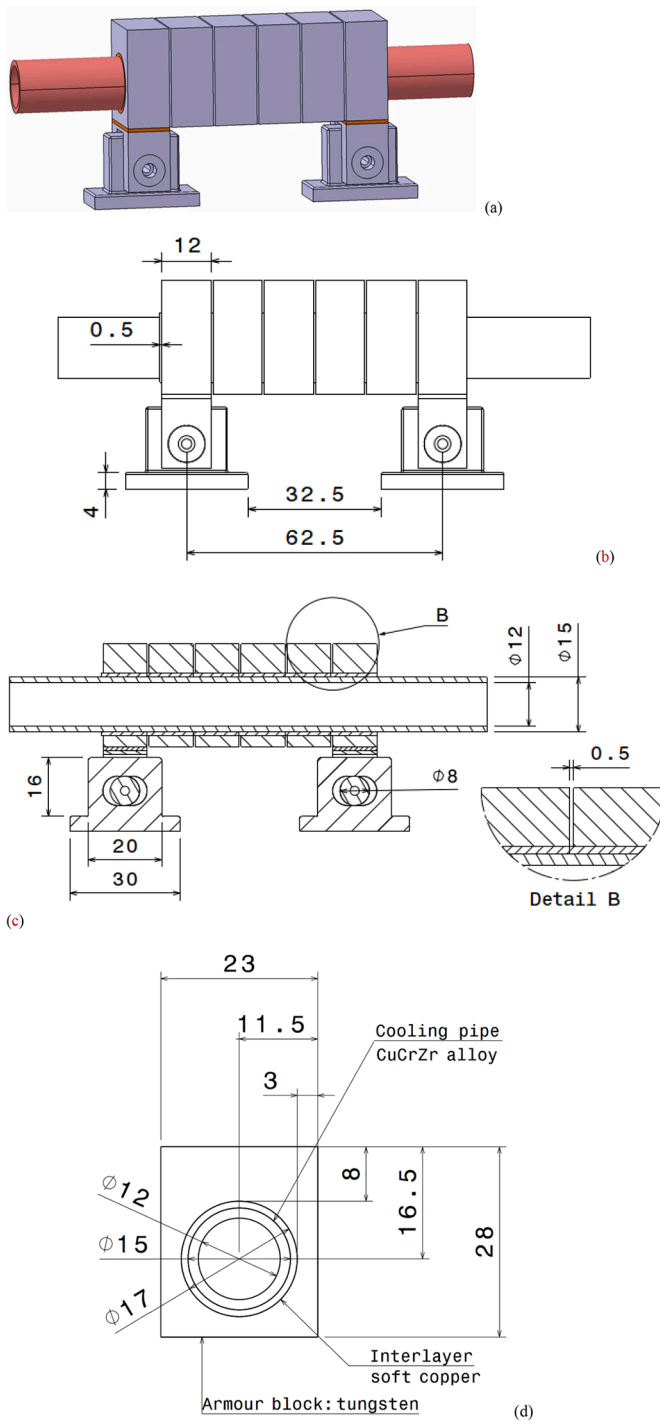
A typical target element segment and technical drawings (a: CAD model, b: lateral view, c: longitudinal section, d: cross section).
